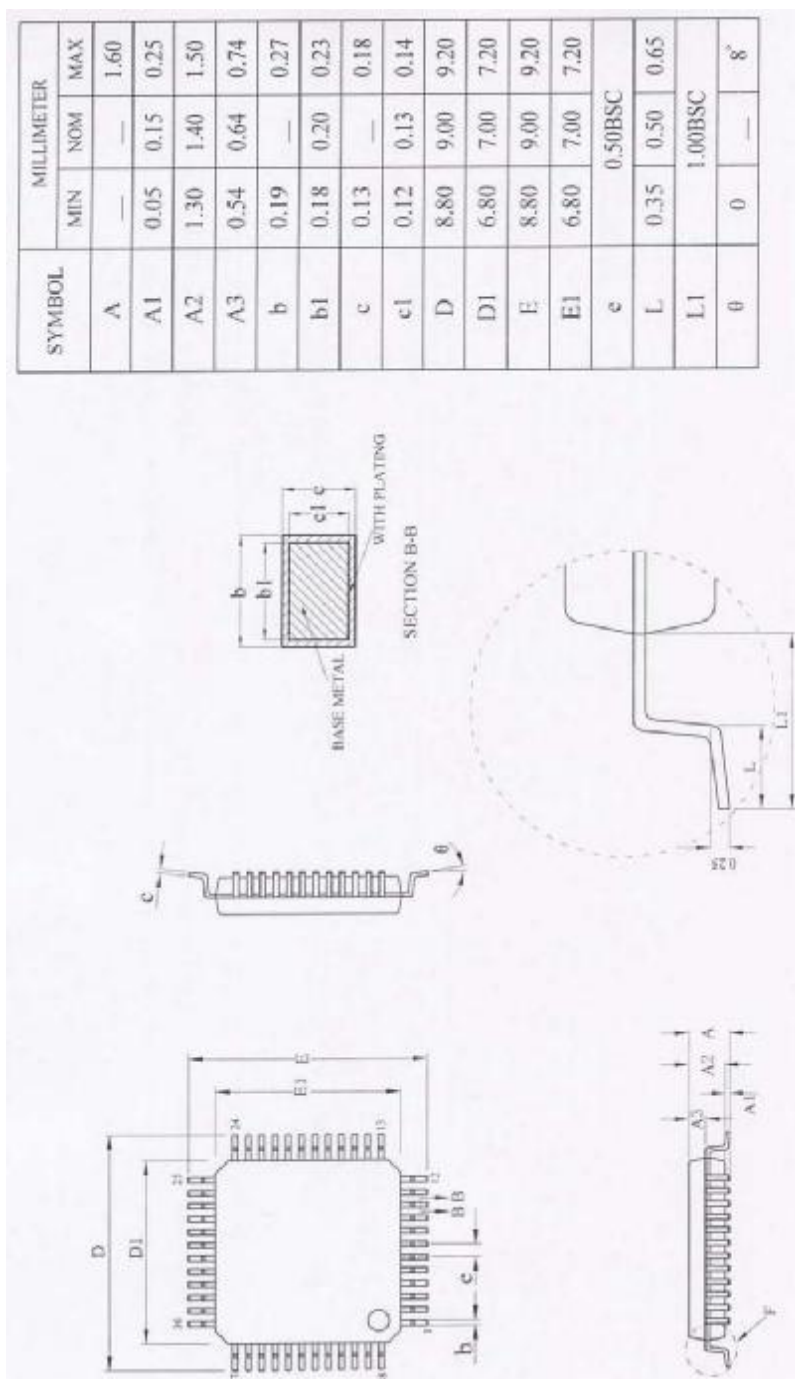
LQFP48-7x7mm Package Dimension Parameter
